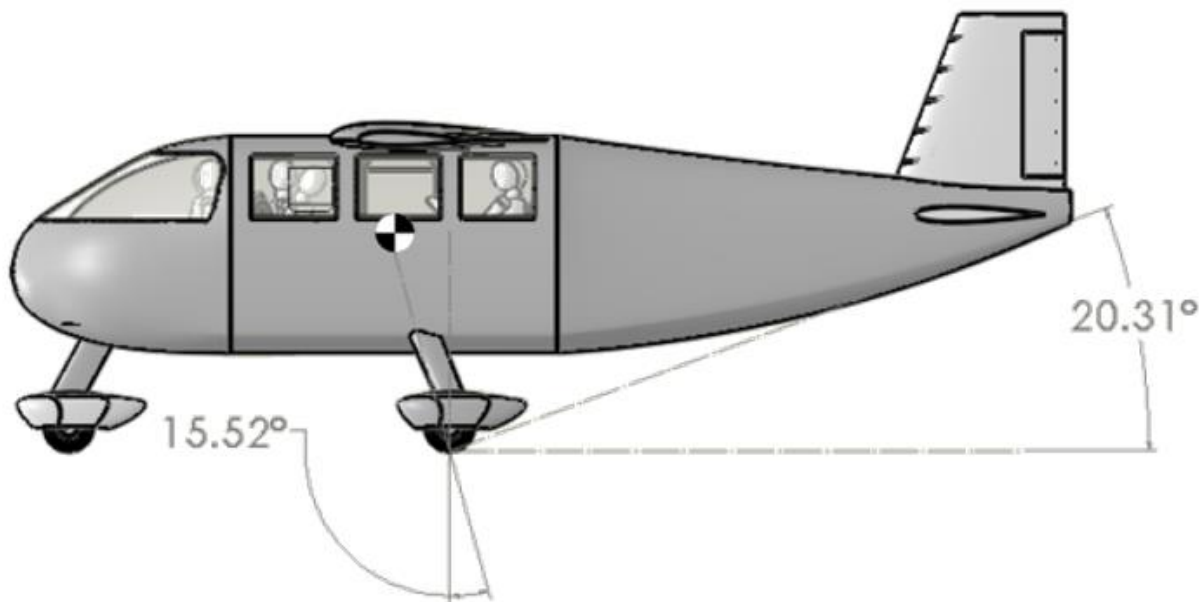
Landing Gear tip-back and Main gear relative to CG angle
